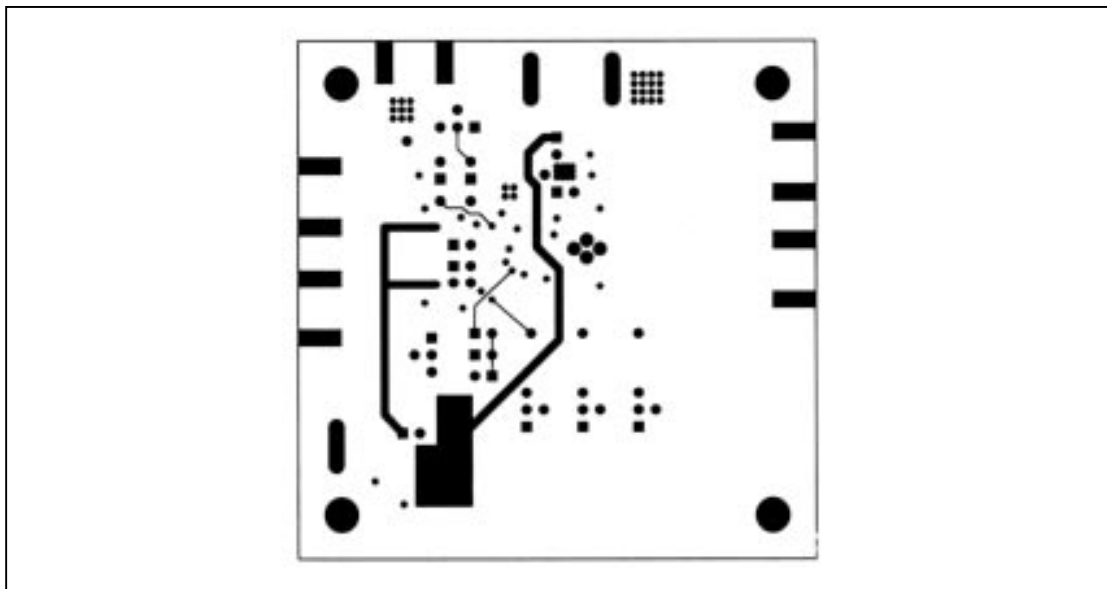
MAX3962 EV Kit PC Board Layout—Solder Side
